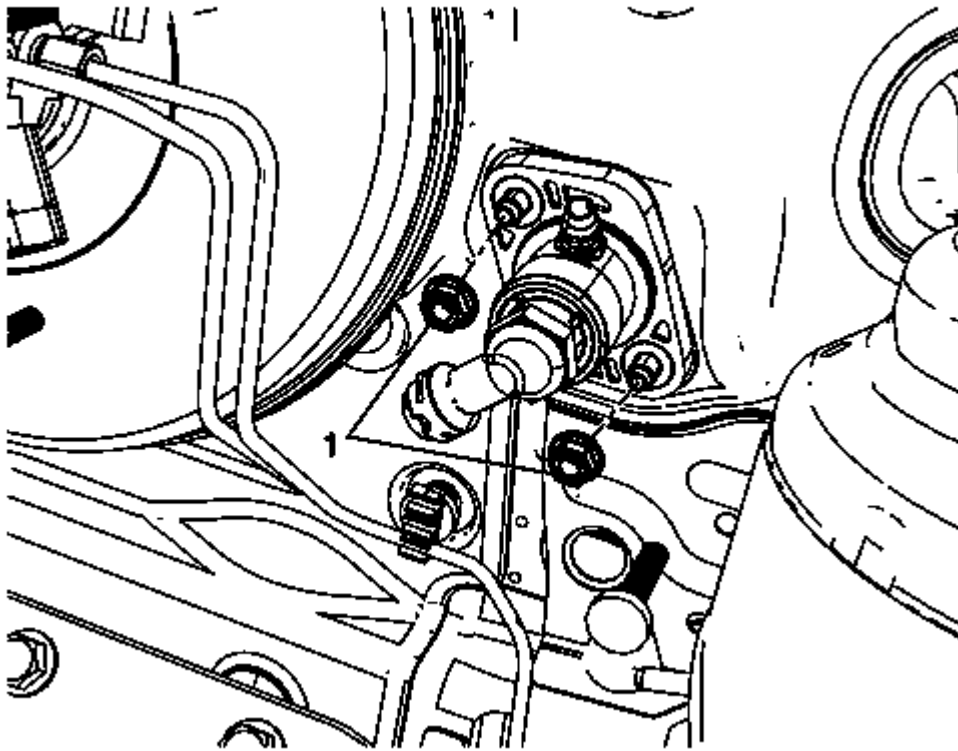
2 Clutch Master Cylinder Mount Nuts
